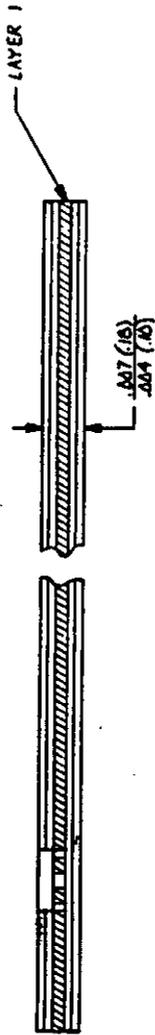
SINGLE SIDED TEST SPECIMEN
